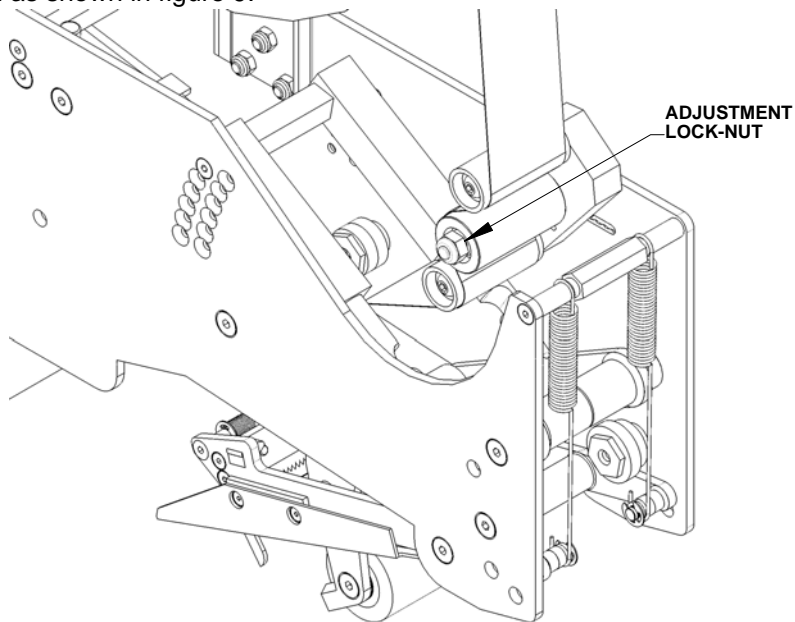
Clutch PTFE Roller Tension Adjustment Lock-nut
